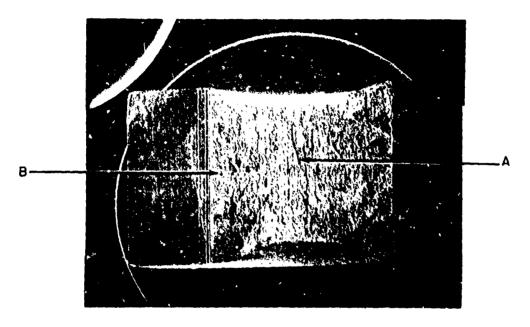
Fracture surface of a hydrogen-embrittled A-36 fatigue specimen, 8x.
